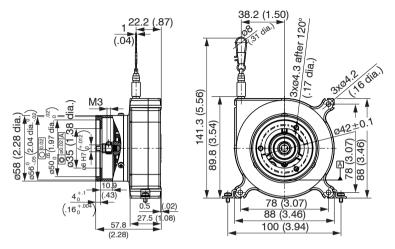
Dimensional drawing of WPS-xxxx-MK88-M, dimensions in mm (inches, rounded off)
